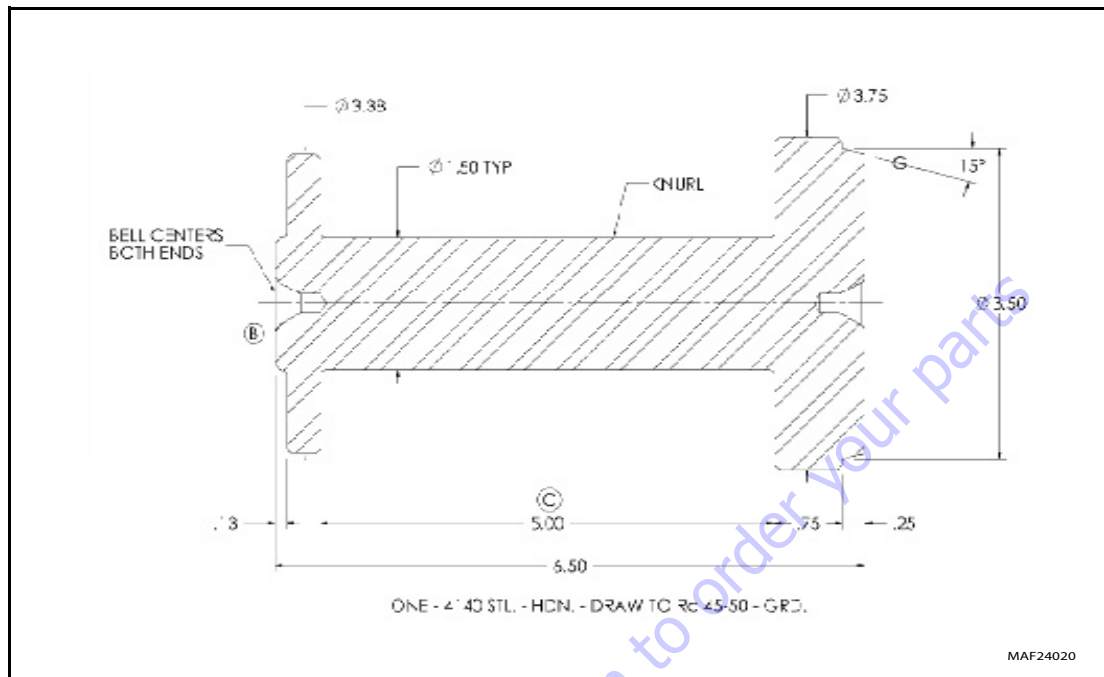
Bearing Cup Pressing Tool (T155291)
